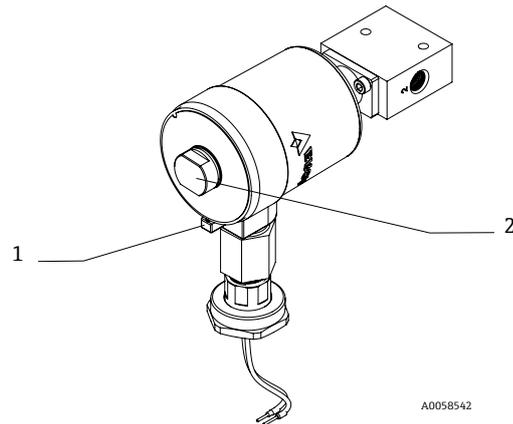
Versa valve assembly with set screw (1) and 7/8" cover knob (2)
